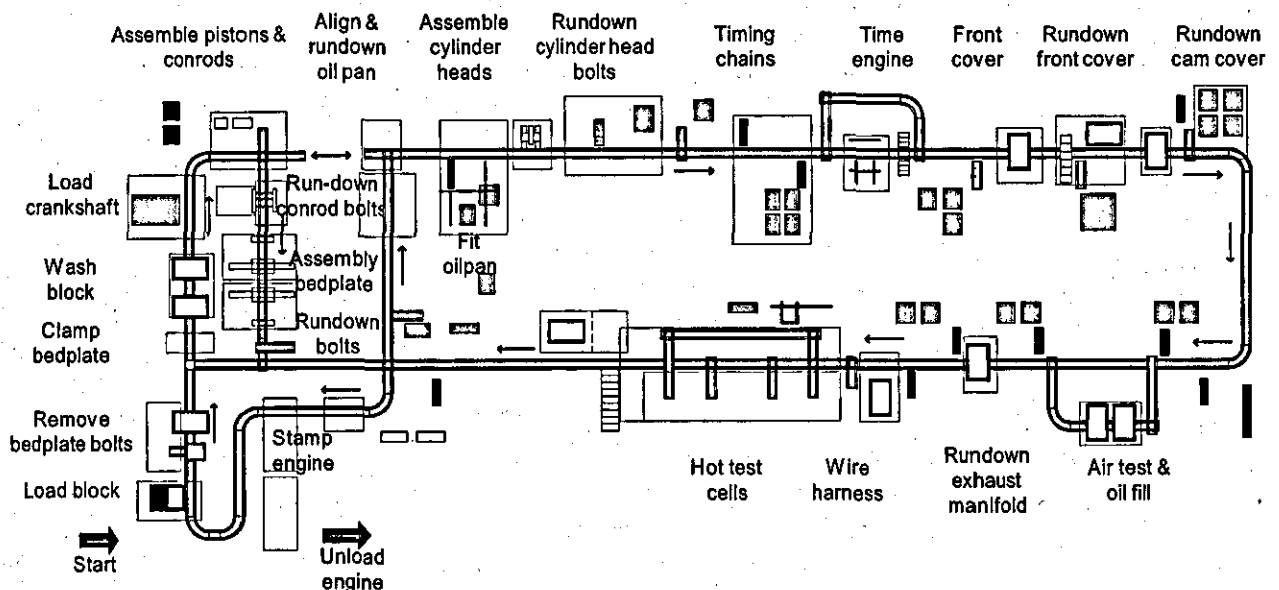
Example of Automotive Engine Assembly Plant. Source J. A. Krause Maschinenfarik GmbH
